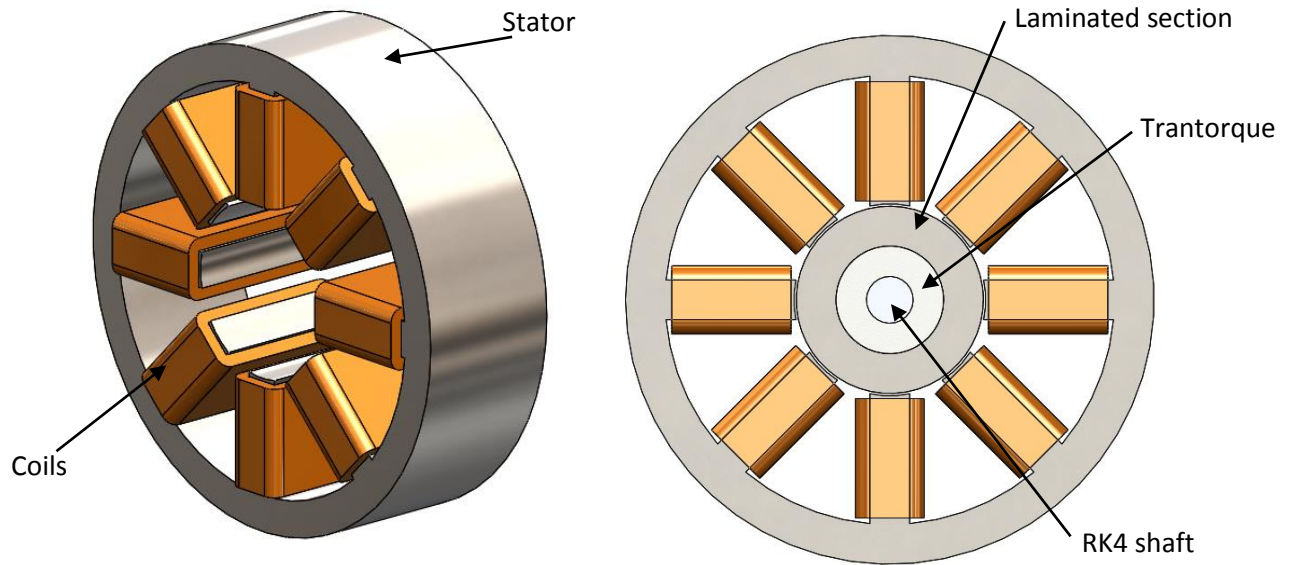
AMB assembly mounted to existing rotor kit assembly.
